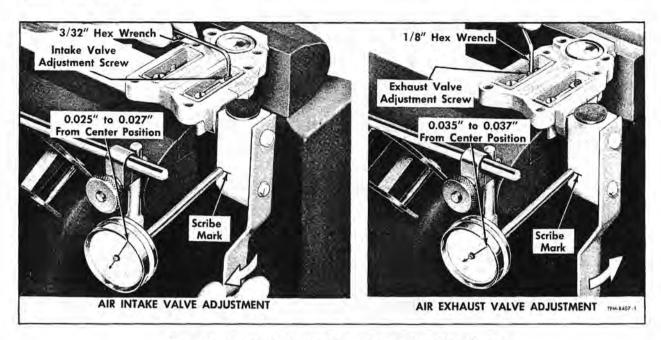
Method of Adjusting Air Valve Lever Gaps (Front Shown)
